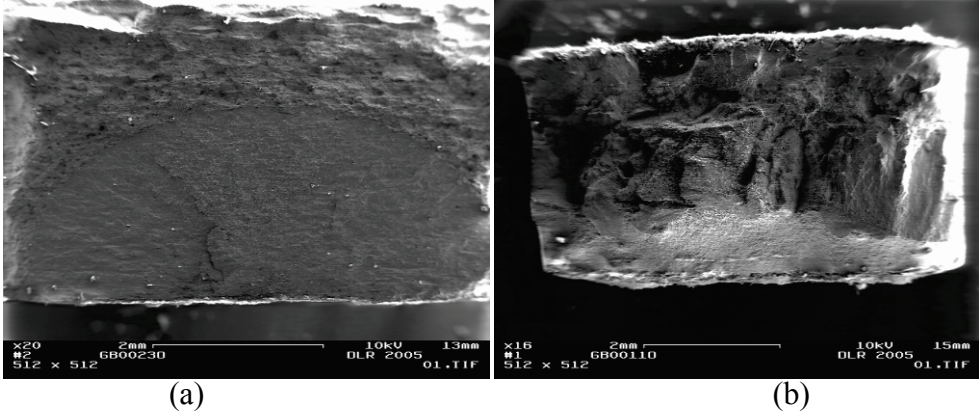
Scanning electron micrographs of the fracture surfaces of pre-corroded fatigue tested samples of FSW 2024A/6056 joints (a) in “as welded” and (b) in PWHT conditions.
